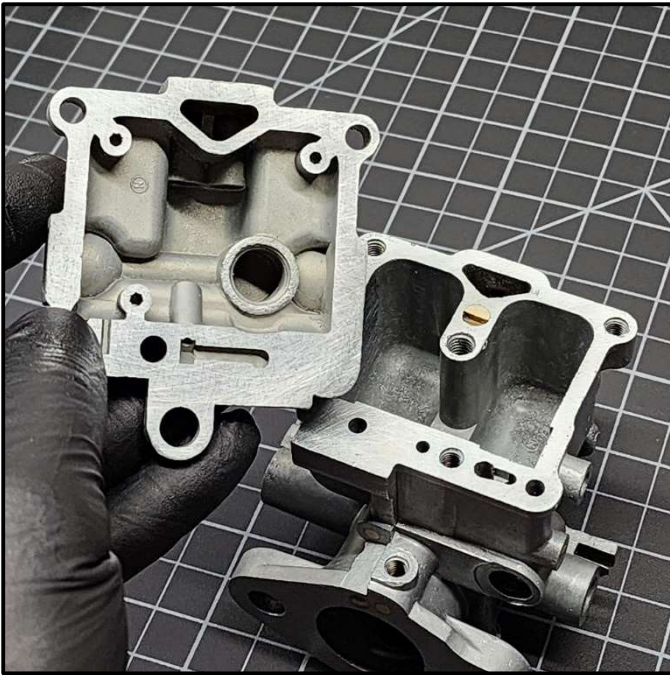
Both mating surfaces are planed and the parts have been cleaned using carb cleaner to remove all metal particulates from the planing process.
